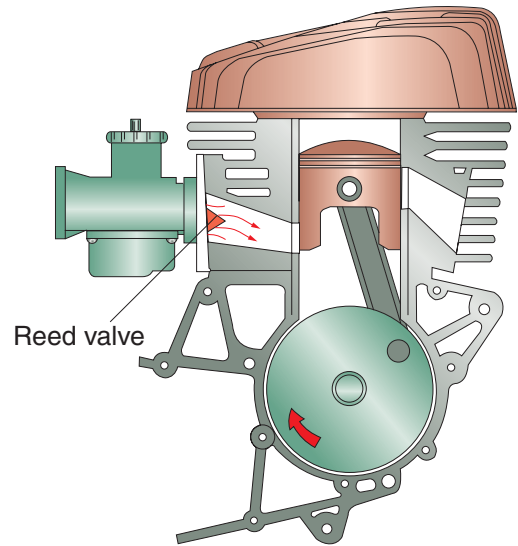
The location of the reed valve in a cylinder reed valve induction system in an air-cooled two-stroke engine.
